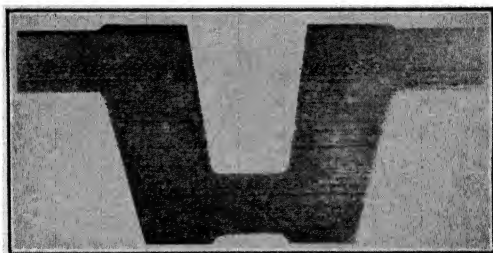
Bad condition of fiber in a shaft machined from bar stock.
